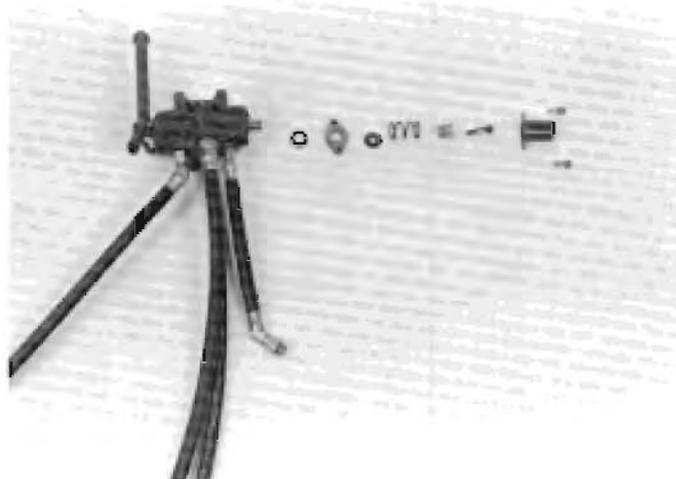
C-Series Hydraulic Valve Overhaul
